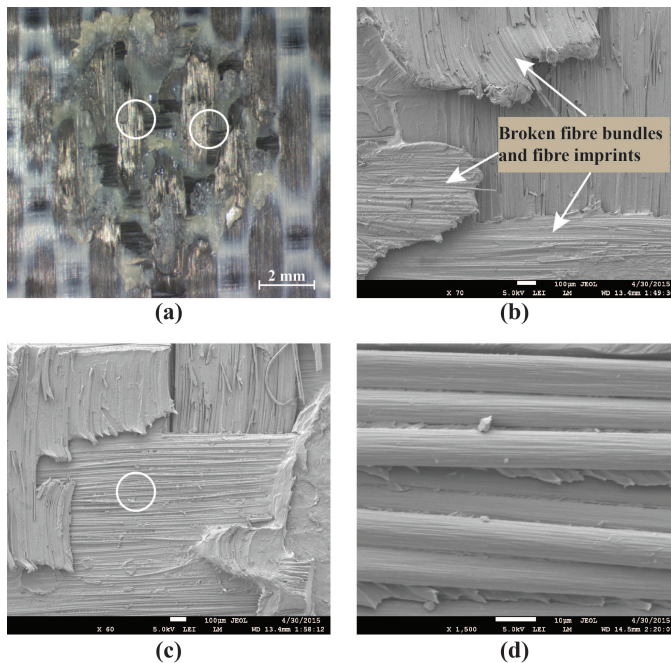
Fracture surface (a) and SEM detail (b-d) for spot welded joints after DLS tests. The left and right circles in (a) indicate the approximate locations of (b) and (c), respectively. The circle in (c) indicates the location for (d). Welding parameters: 600 J energy, 1500 N welding force, 60.8 μm peak-to-peak amplitude.
